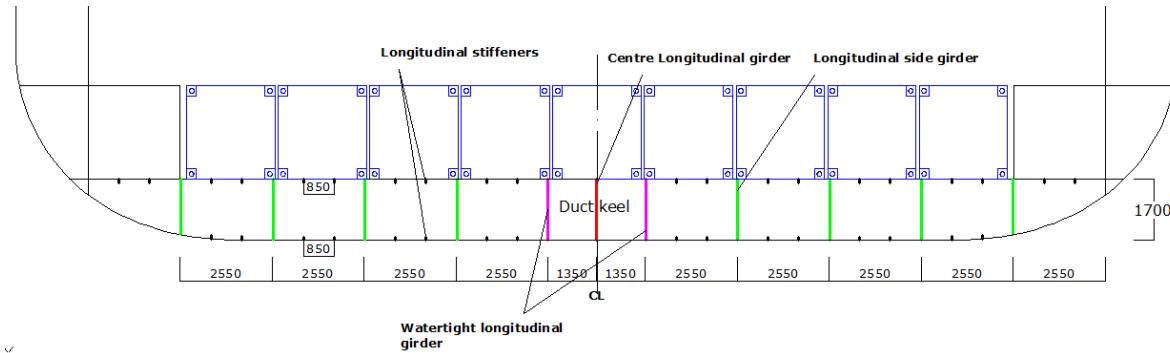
Double bottom structural element arrangement in the transverse direction.
